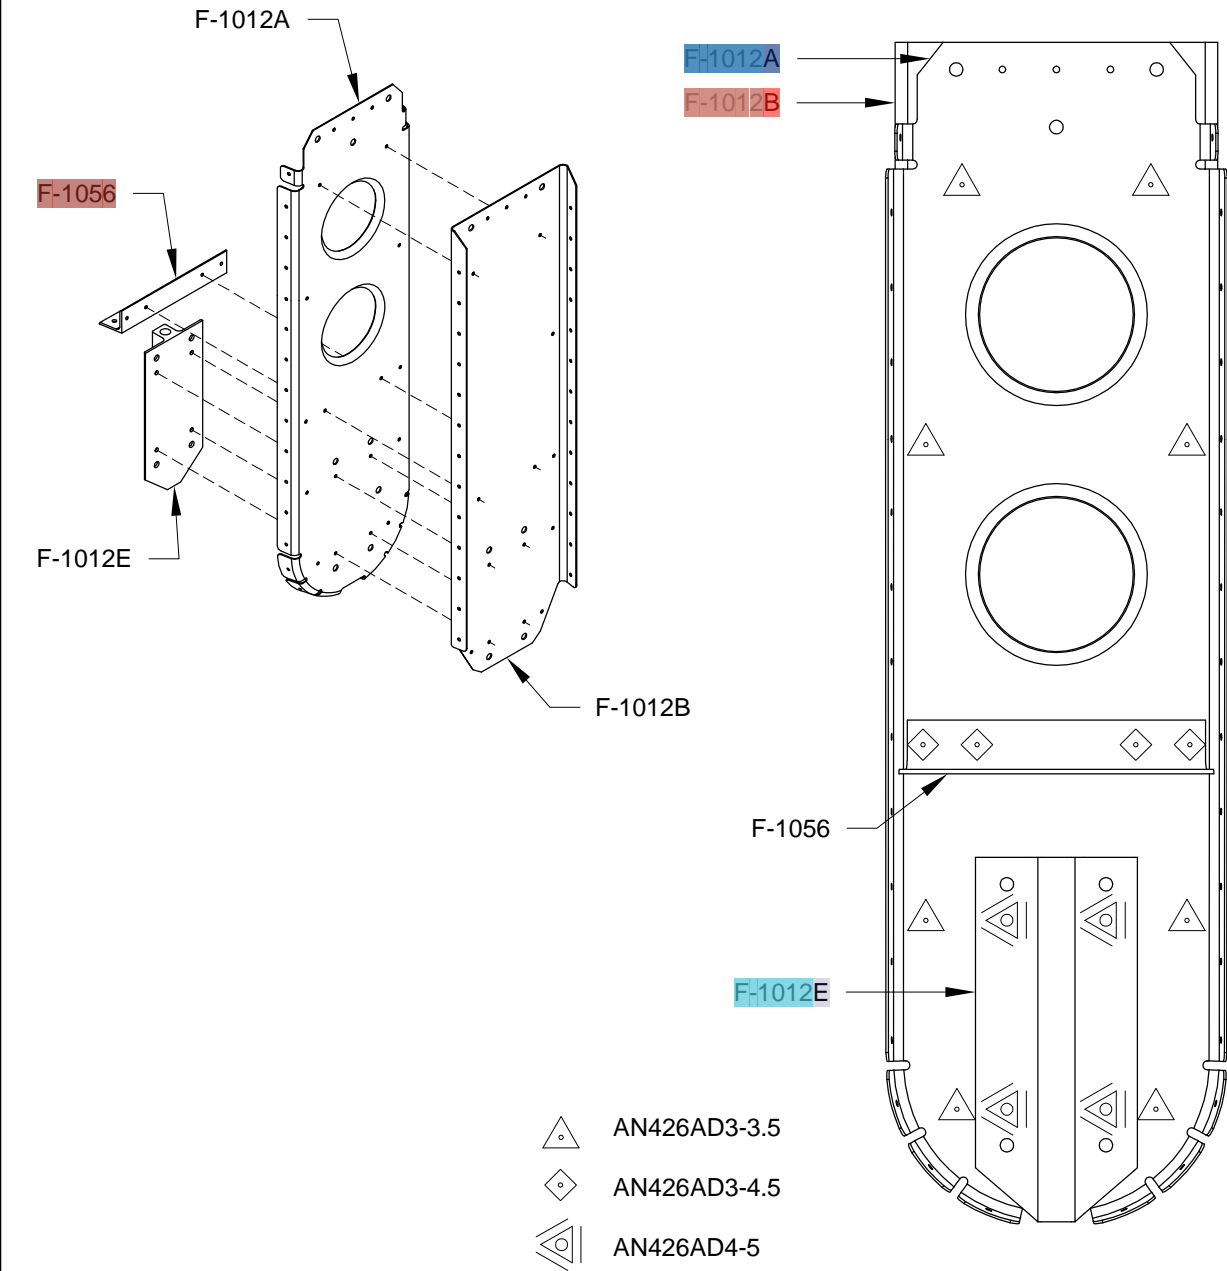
RIVETING THE F-1012 BULKHEAD AND PARTS
